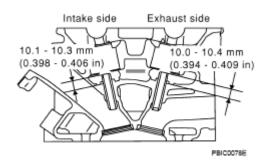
Identifying Valve Guide Dimension Courtesy of NISSAN MOTOR CO., U.S.A.
